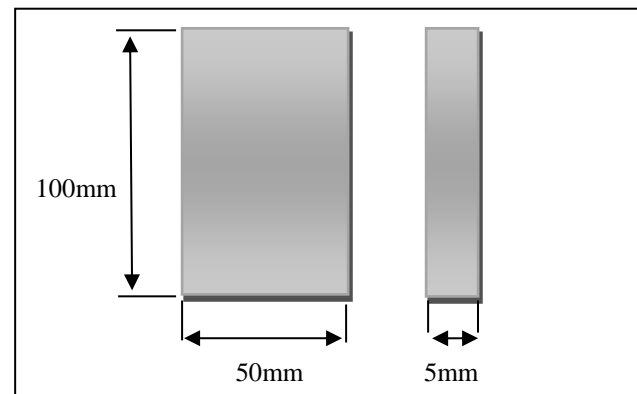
Weld pieces' dimensions Conclusions.
